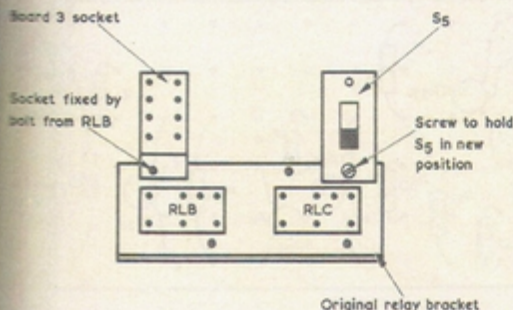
Mounting S5 in its new position. Also shown is the socket for Board 3 employed in the prototype. Alternative sockets may have a different appearance and require other methods of mounting
